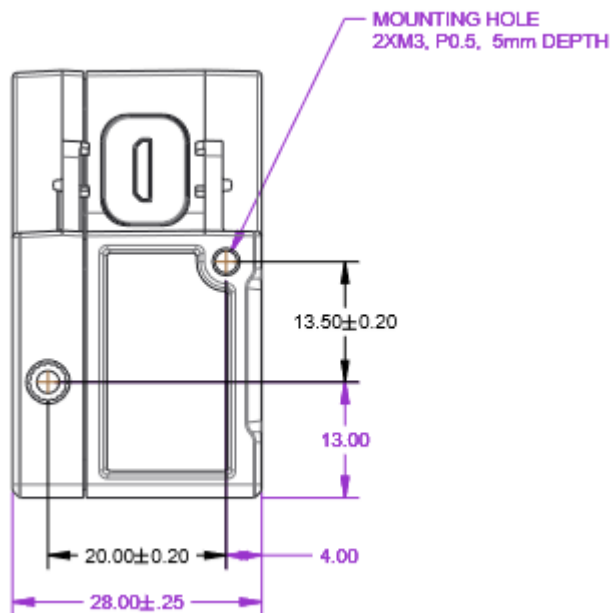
MS4717 Mounting Dimensions (Overhead View)
